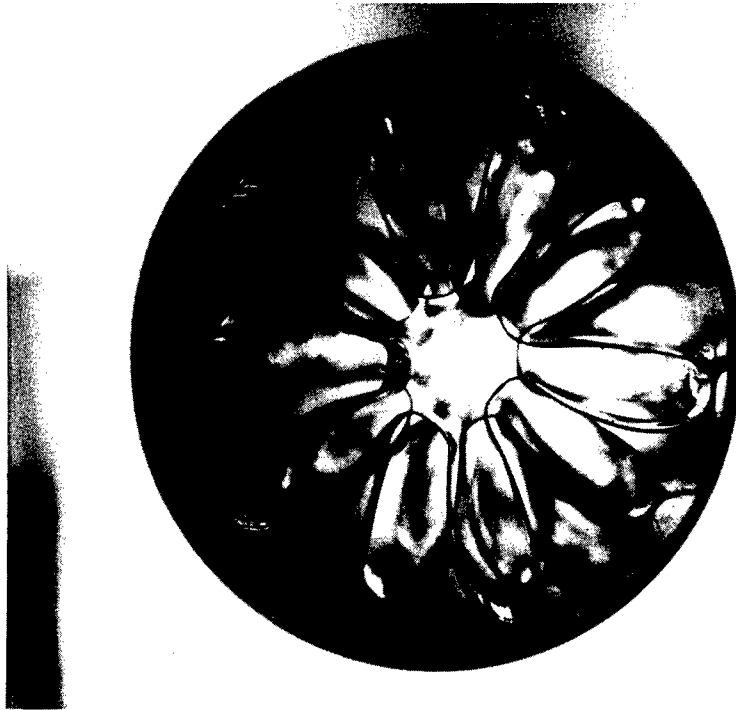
INTERNAL VIEW OF 18-INCH HEAT RECEIVER TUBE (1.25 in. Major Dia.); Design B Fin Modules Brazed in Position
